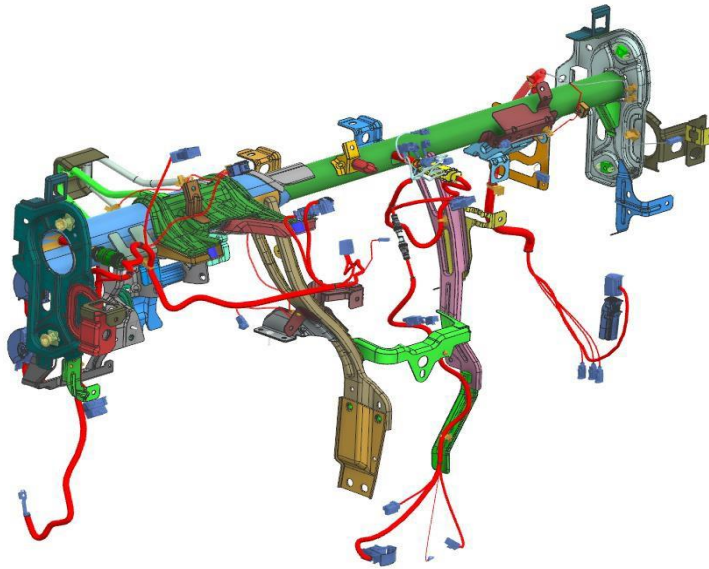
Cross-Car Beam old version isometric-view four small openings
